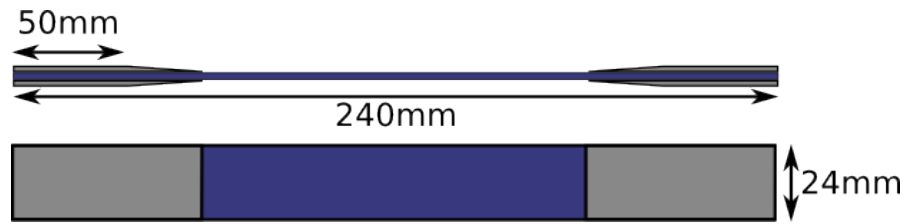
UNT samples dimensions, following ASTM D3039 [98]
